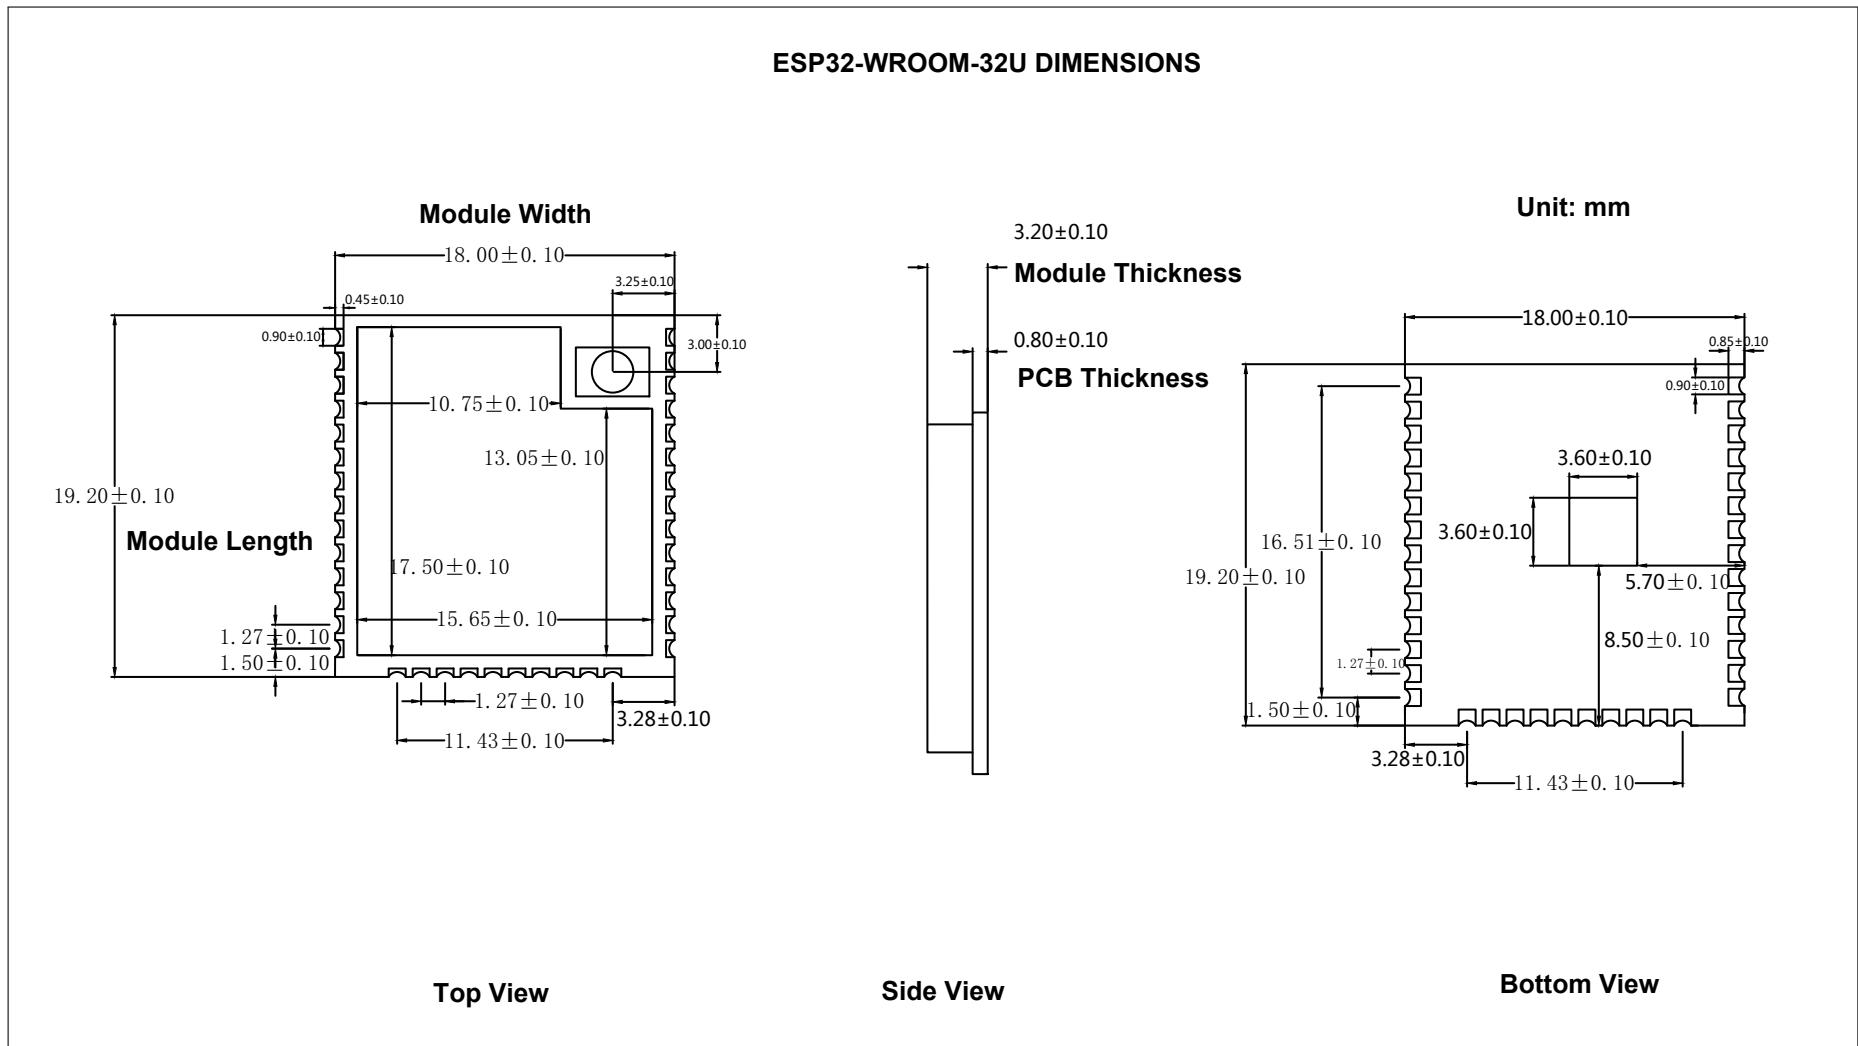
Physical Dimensions of ESP32-WROOM-32U
